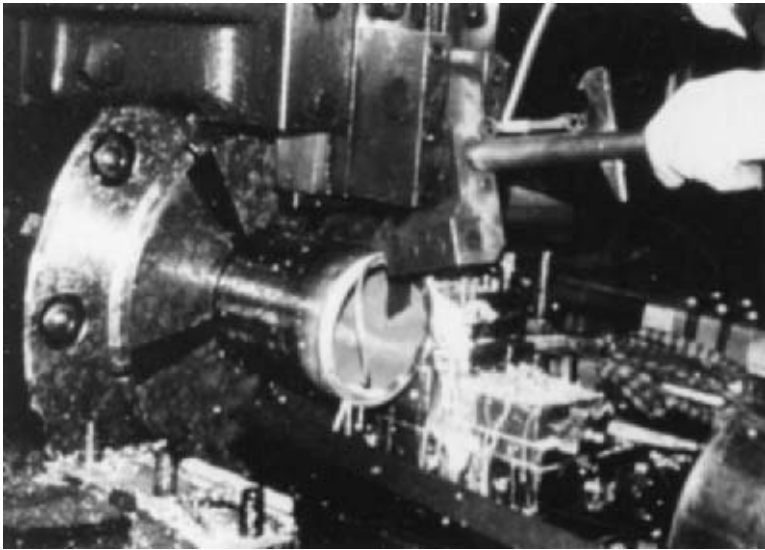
Pipe-cutting machine. (Pullman Power Products Corporation)
